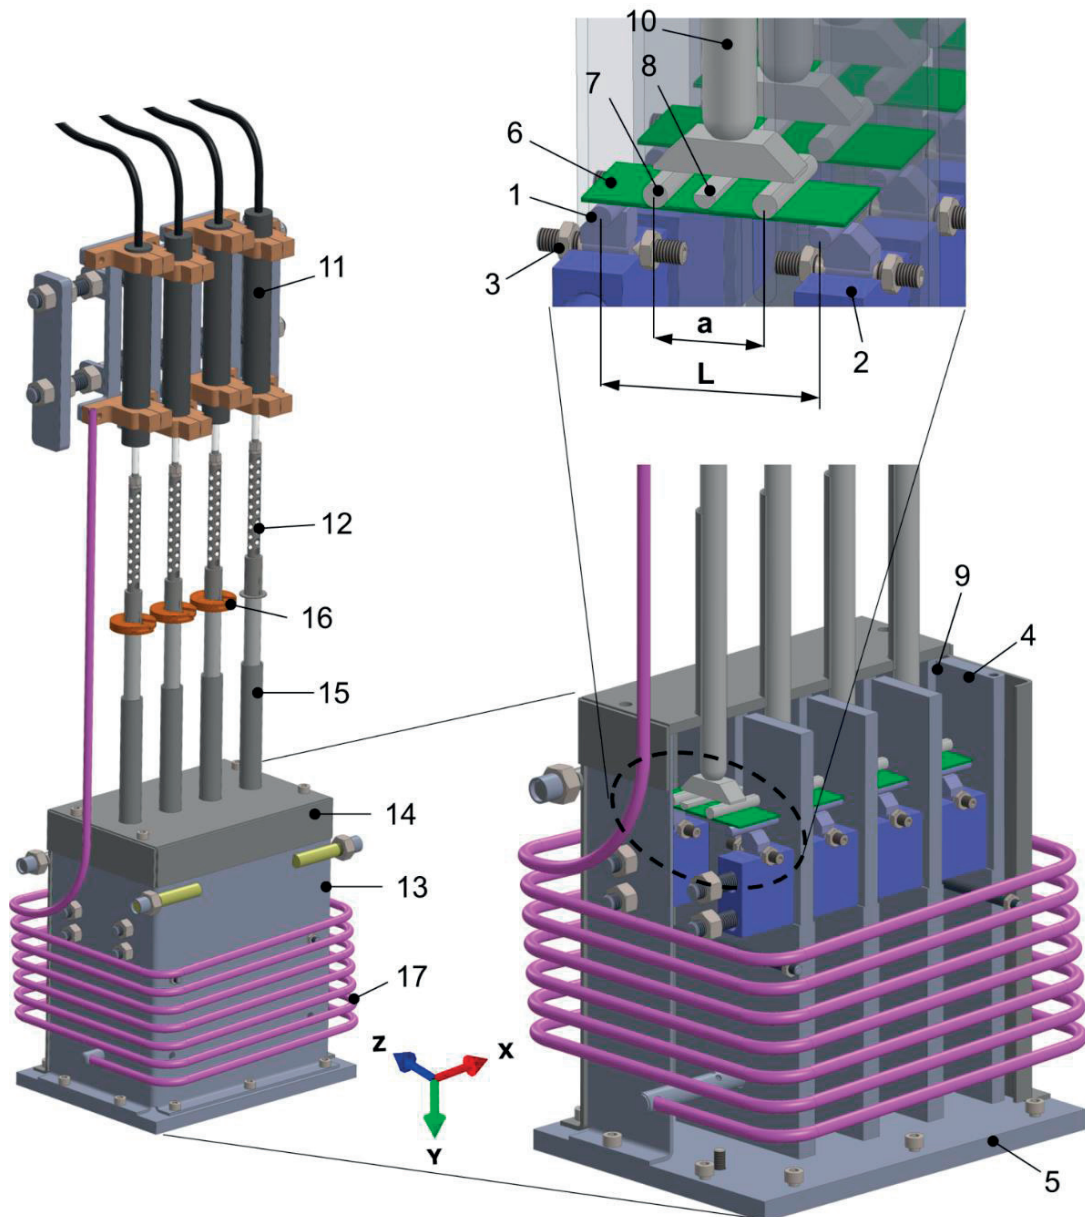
3-D sketch of CRP setup and detailed views of the testing fixture.
